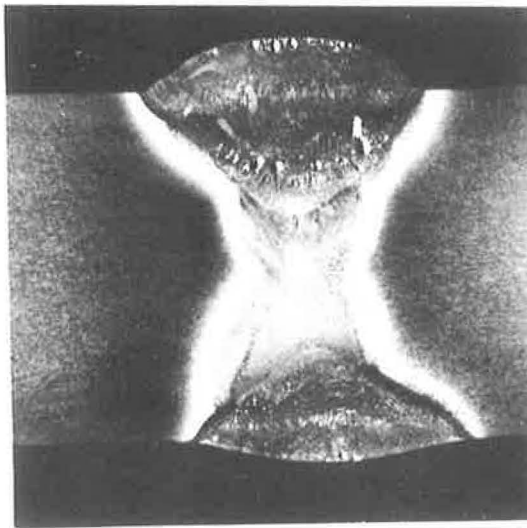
Macrographs of sections through butt welds in 1-in. 2219-T87 plate (mag. 2X, etch 10% NaOH).
